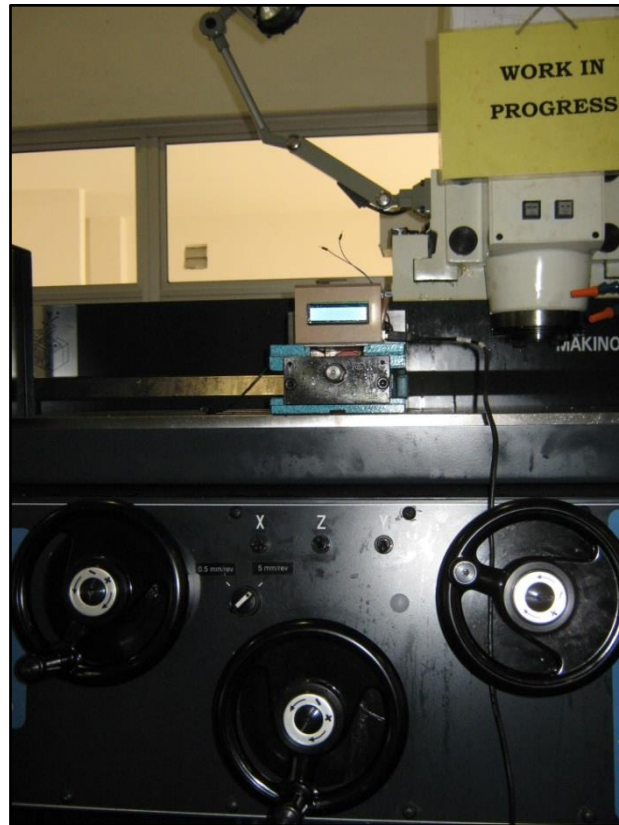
Device is being run on platform (Milling Machine) for z-axis direction at maximum height.
